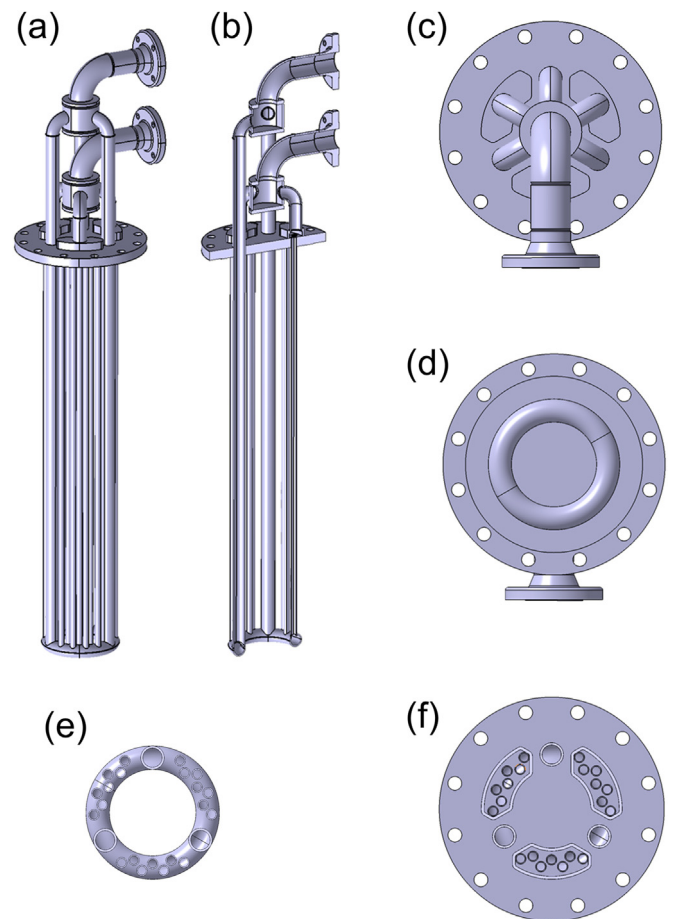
Three-dimensional model of the PILLAR heat exchanger tube side. (a) Isometric view, (b) cross-sectional view in the vertical direction, (c) top view, (d) bottom view, (e) cross-sectional view of the lower chamber, and (f) cross-sectional view of the upper chambers.
